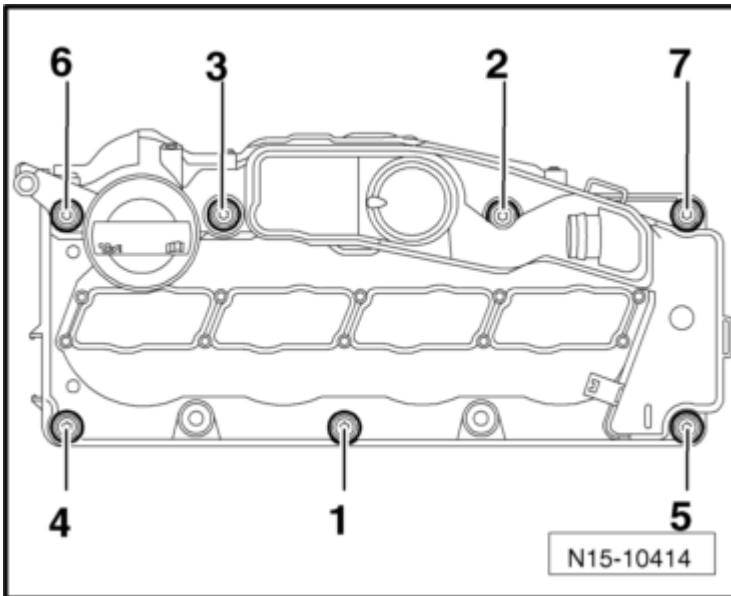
Identifying Head Cover Bolts -1 Through 7- Tightening Sequence
